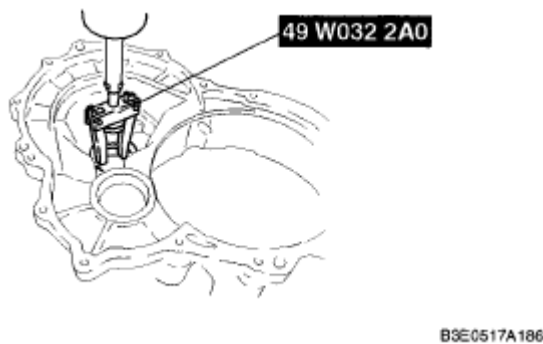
Removing Bearing Race And Adjustment Shim From Converter Housing
